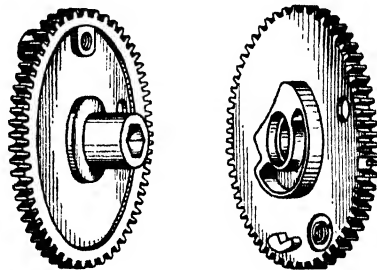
In this one-piece die casting, there are combined a complete spur gear with cast teeth, a cam near the center and a small one near the periphery, a hub with a hex recess, and two bosses. To form all these parts separately with equal accuracy and assemble them would be expensive but the die casting can be produced complete at the rate of several a minute.
